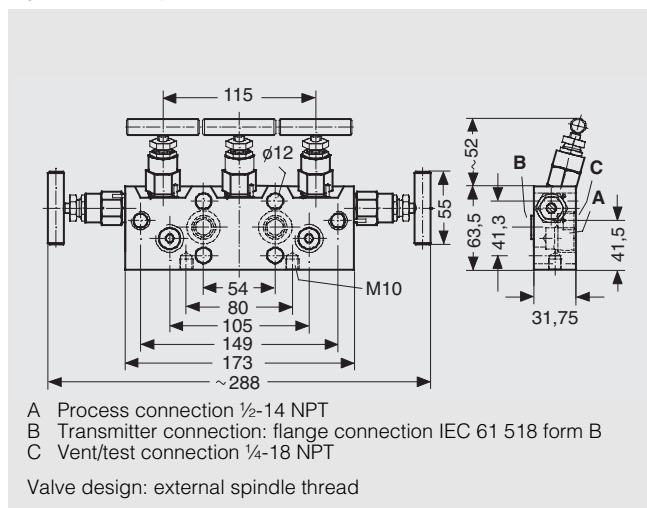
/82 Five-spindle valve manifold DN 5, dimensions
